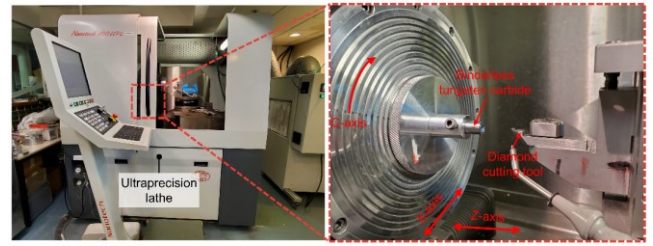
Fabrication setup of aspherical BTC mold inserts by traditional single-point diamond turning.
